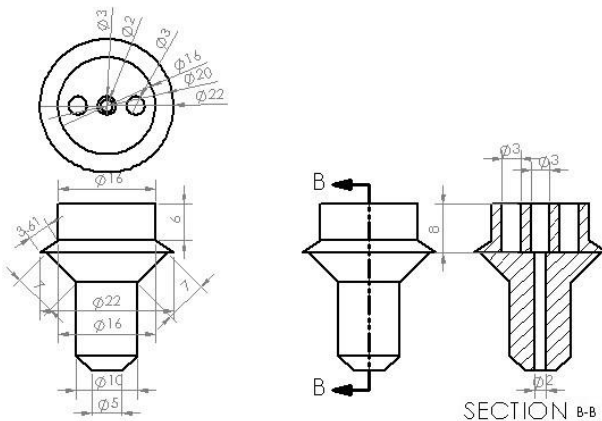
B-B Section cut view and dimension determination design of the nozzle.
